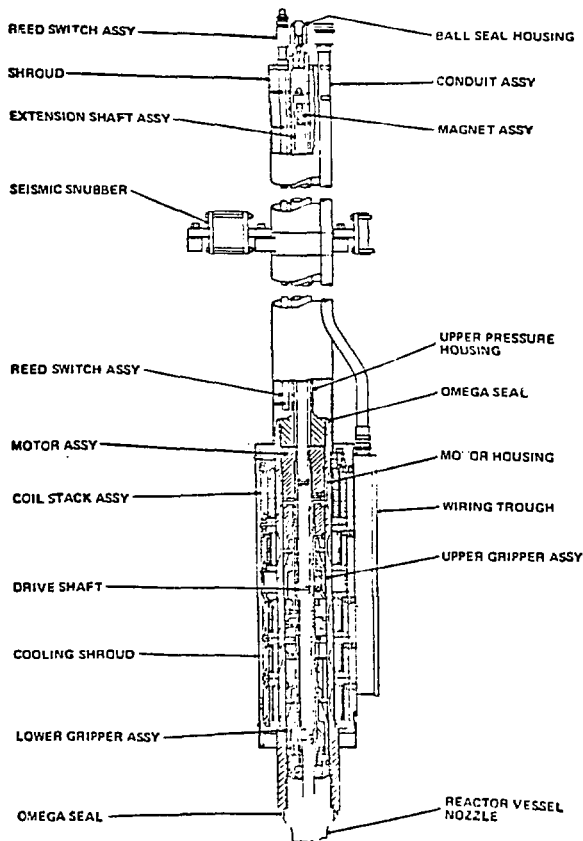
CE Magnetic Jack Control Element Drive Mechanism
